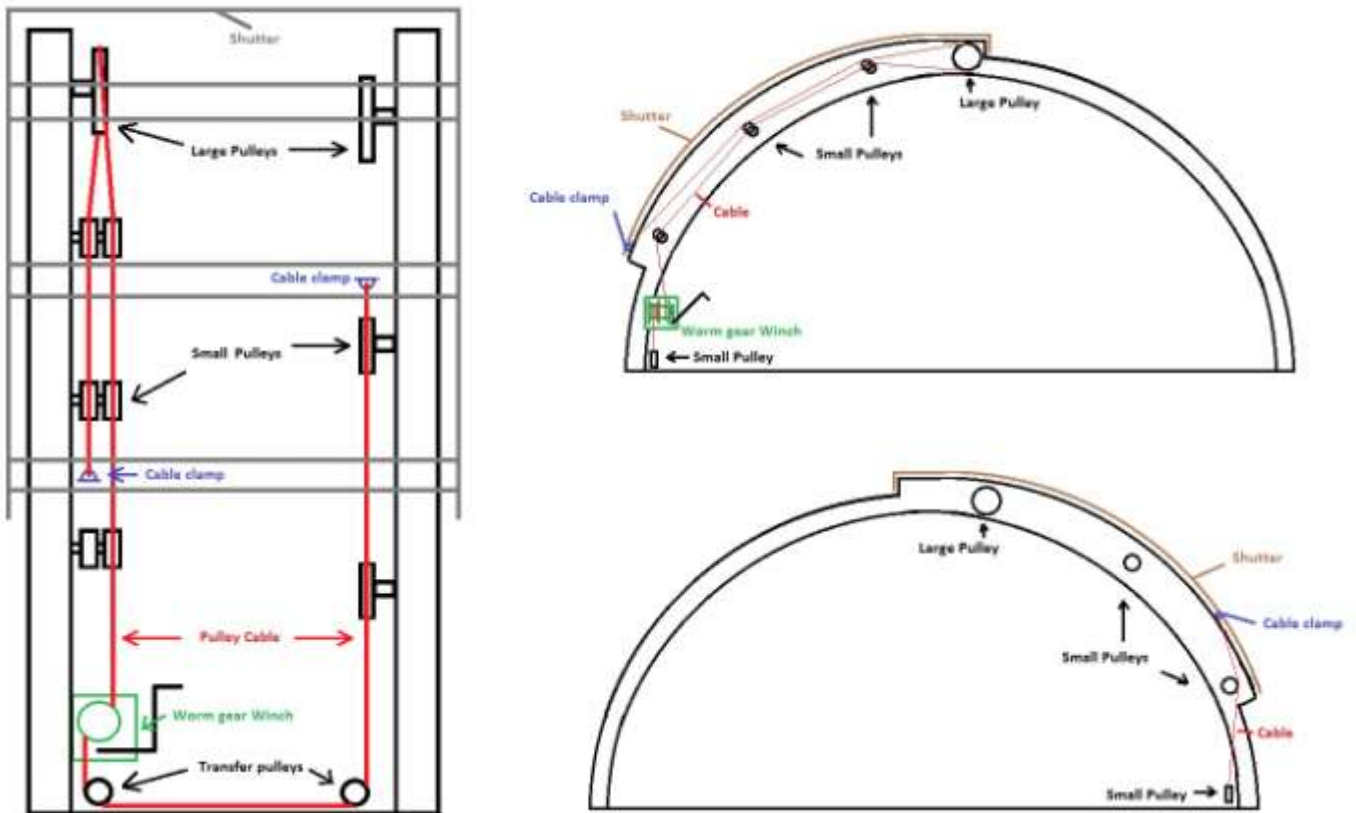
BASIC LAYOUT OF SHUTTER PULLEY SYSTEM AND CABLE ROUTING
